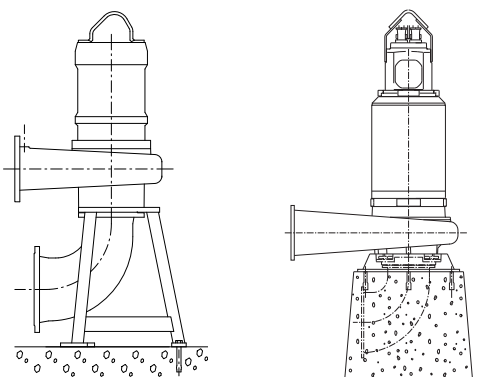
Dry, vertical installation with base stand (left) and base plate on two concrete pedestals (right)
